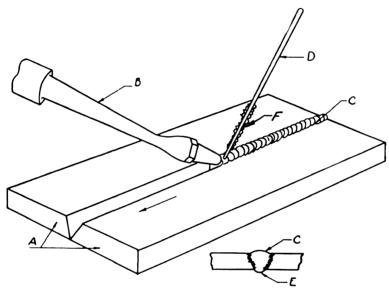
Welding cast iron by the oxy-acetylene process (backward welding): A. Cast iron, B. Torch, C. Build-up, D. Filler rod, E. Penetration, F. Flux
